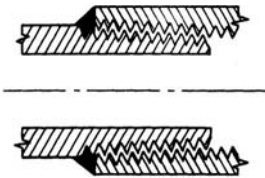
Taper pipe thread seal-welded.
